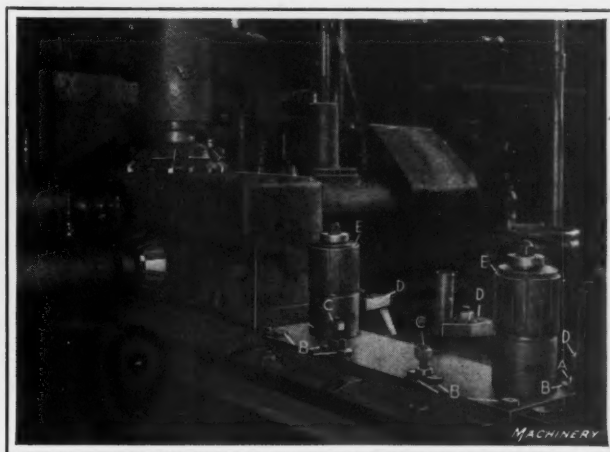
View from Opposite Side of Multiple-spindle Milling Machine shown in Fig. 14, showing Further Details of Cutters and Fixture
